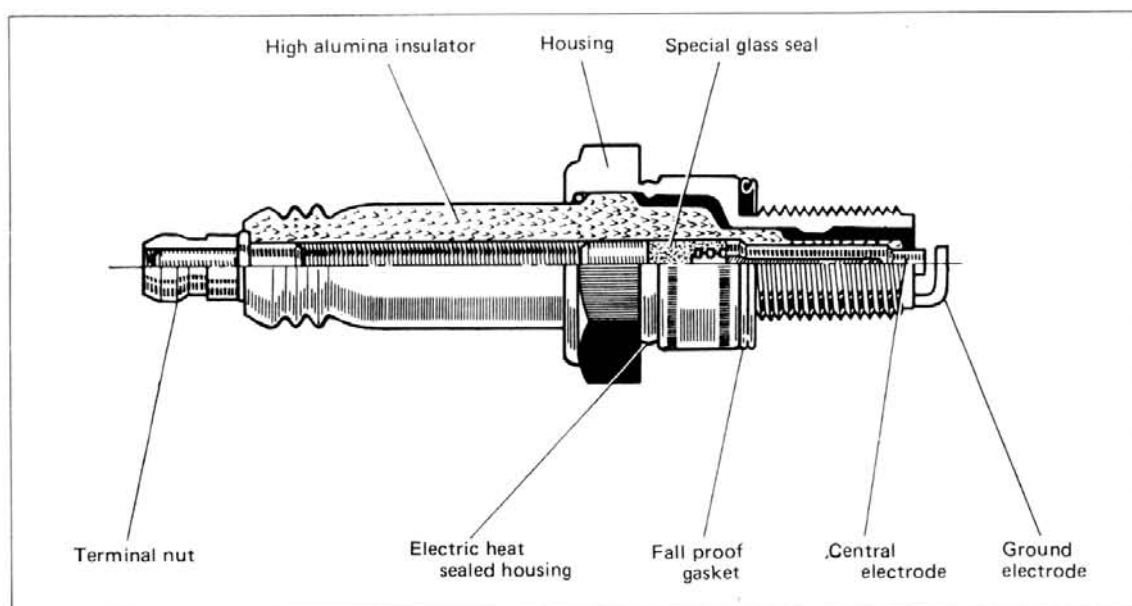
Cross Sectional View of Spark Plug (Nippondenso W17ES)
